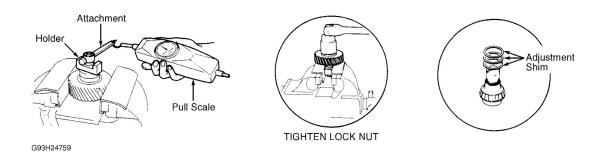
Measuring Idler Gear Preload Courtesy of MAZDA MOTORS CORP.
